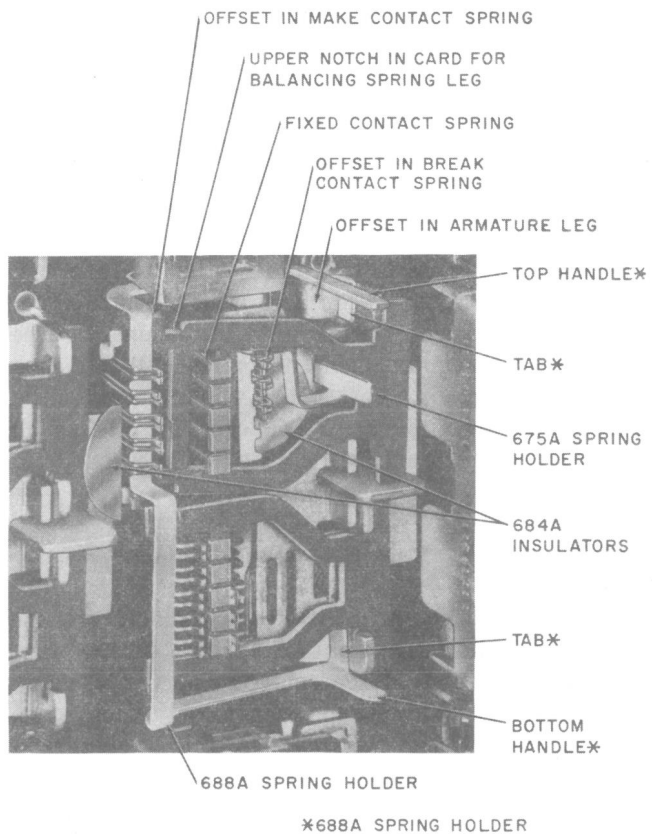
AM-Type Relay—688A Spring Holder Mounted on Relay (675A Spring Holder and 684A Insulators in Place on Upper Half of Relay)
